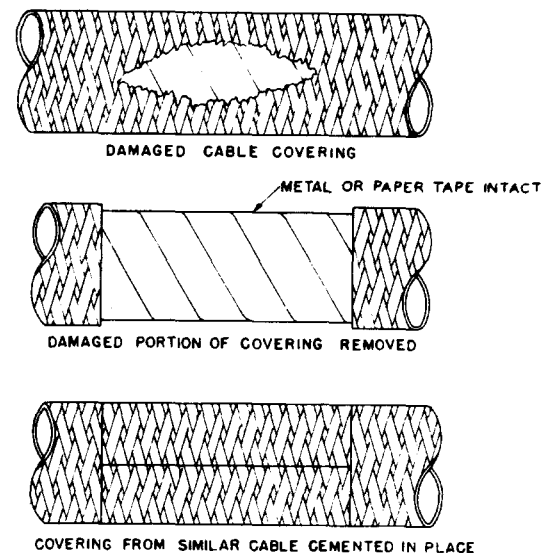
Repair of Damaged Switchboard Cable Fabric Covering
